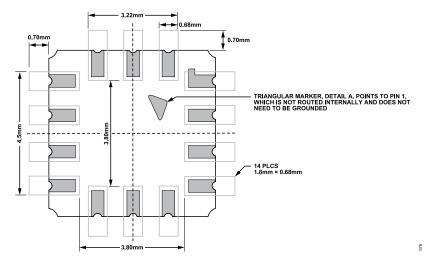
PCB Footprint Pattern and Dimensions in Millimeters
